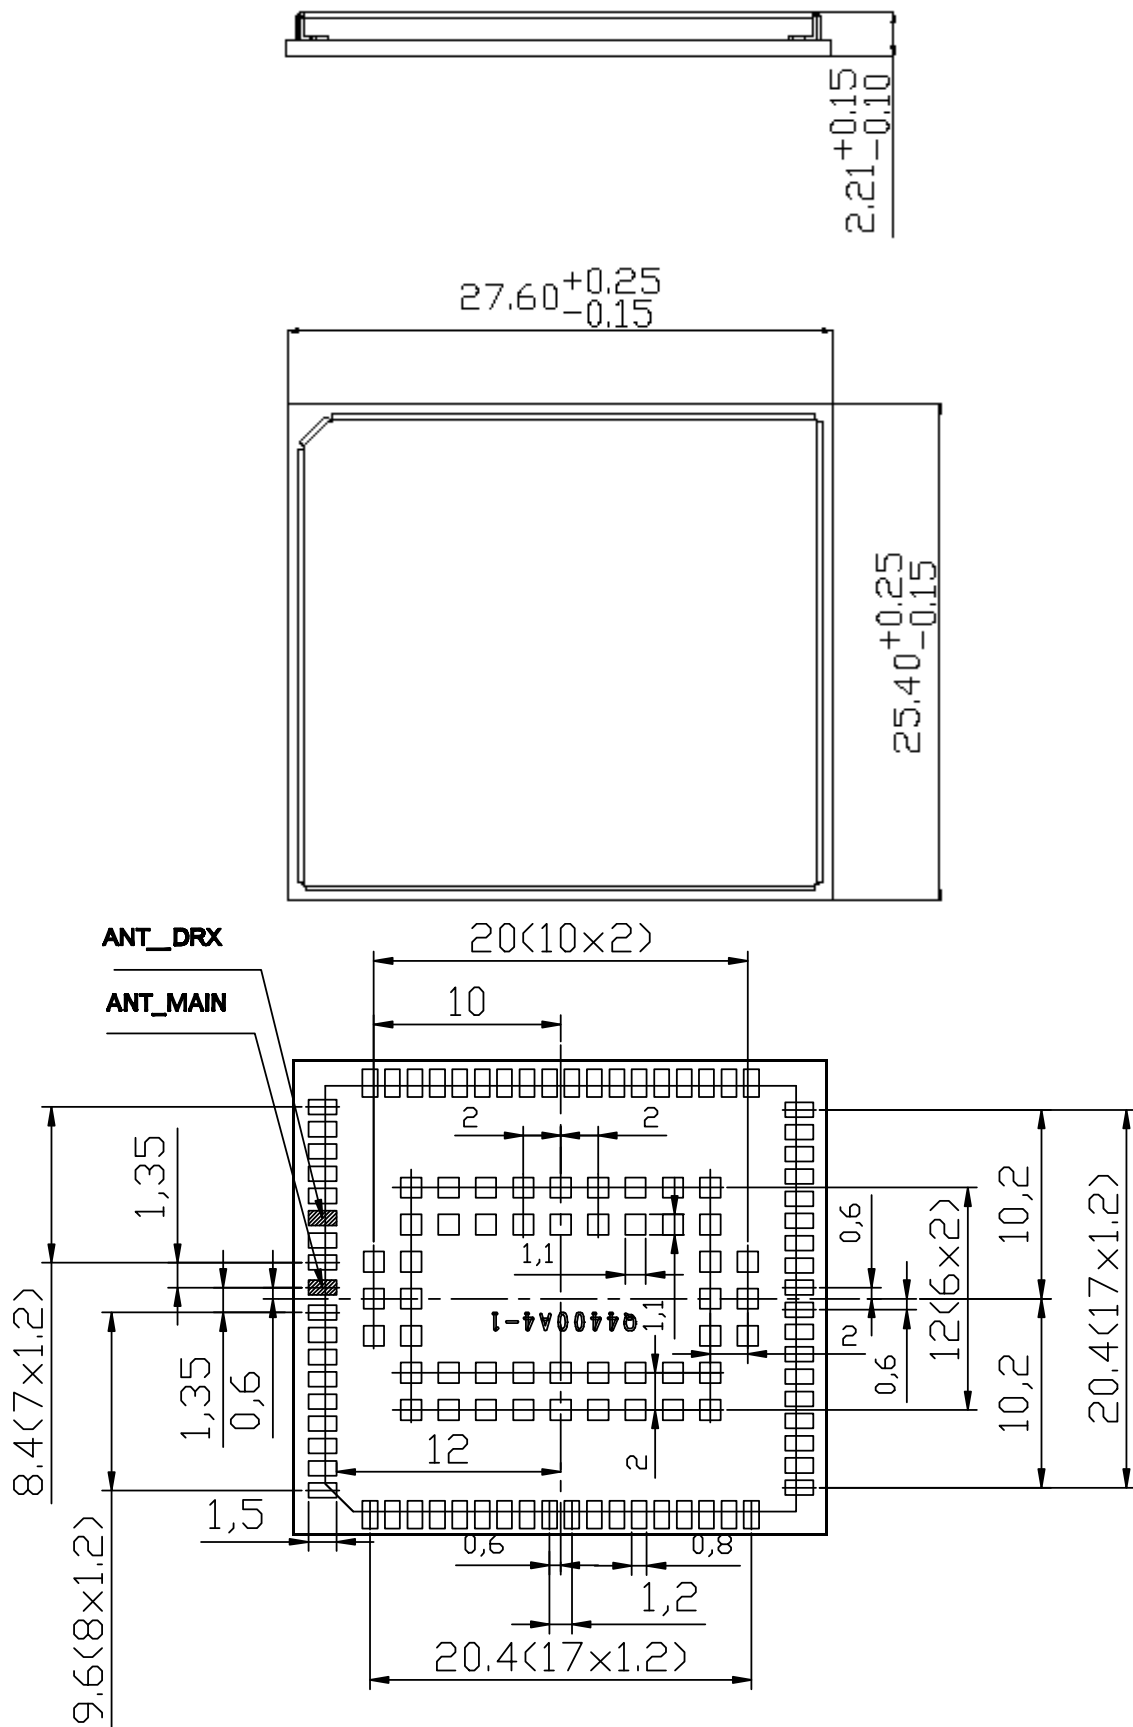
Dimensions of ELS61-E R2 (all dimensions in mm)
